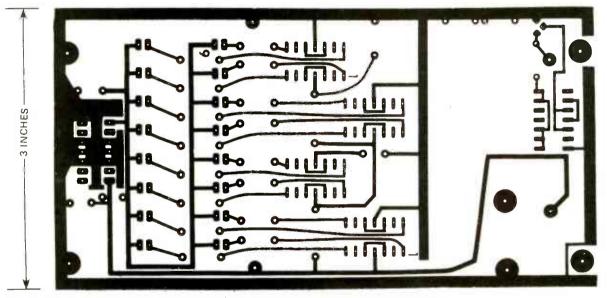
"FOIL-SIDE" of display board. Note that, while board is double-sided, holes need not be plated-through.
